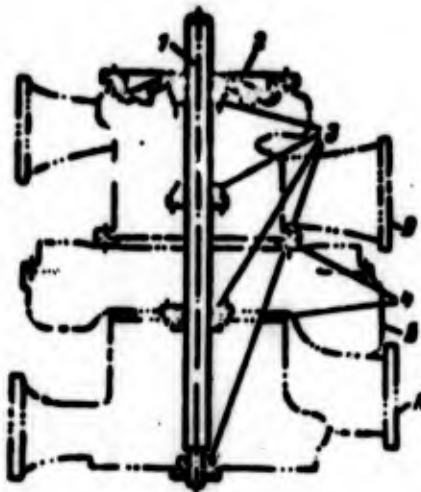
Diagram of checking the coaxiality of units of the turbopump unit: A - fuel pump; 5 - turbine; B - oxidizer pump; 1 - plunger; 2 - industrial cover; 3 - industrial bushings; 4 - key.
